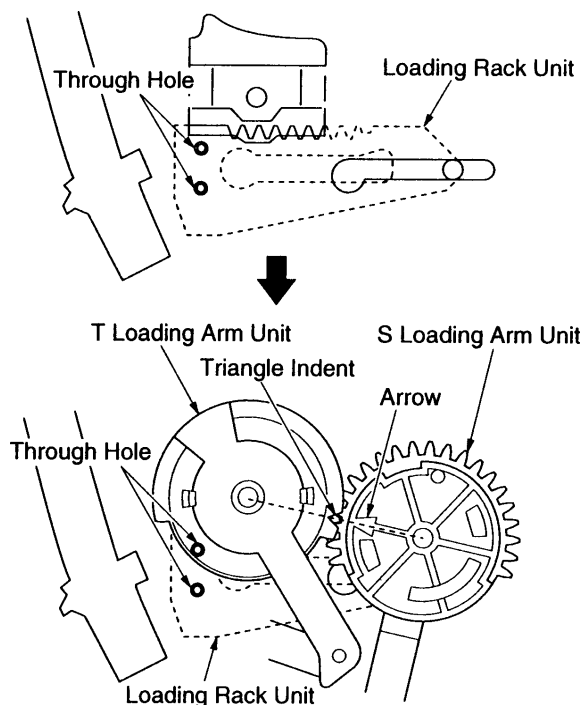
T-Loading Arm Unit/S-Loading Arm Unit Removal
